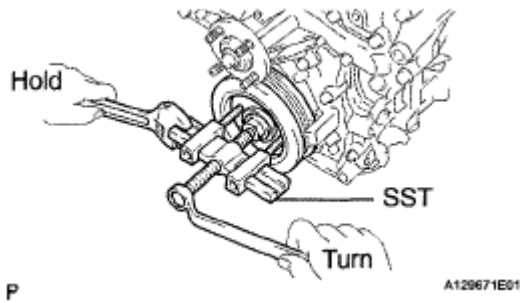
Removing Crankshaft Pulley Bolt And Crankshaft Pulley
